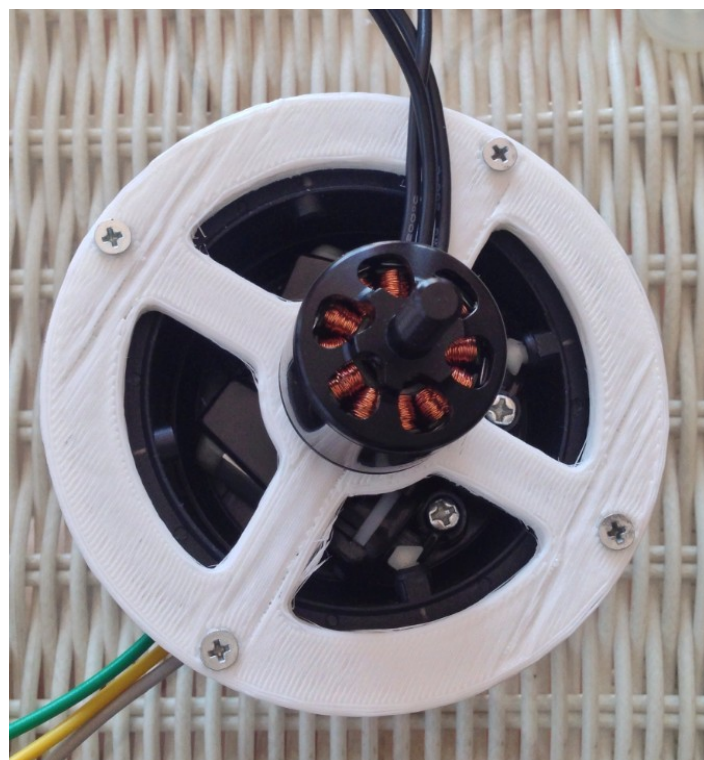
Electrical motor is mounted on the mirror actuator.
